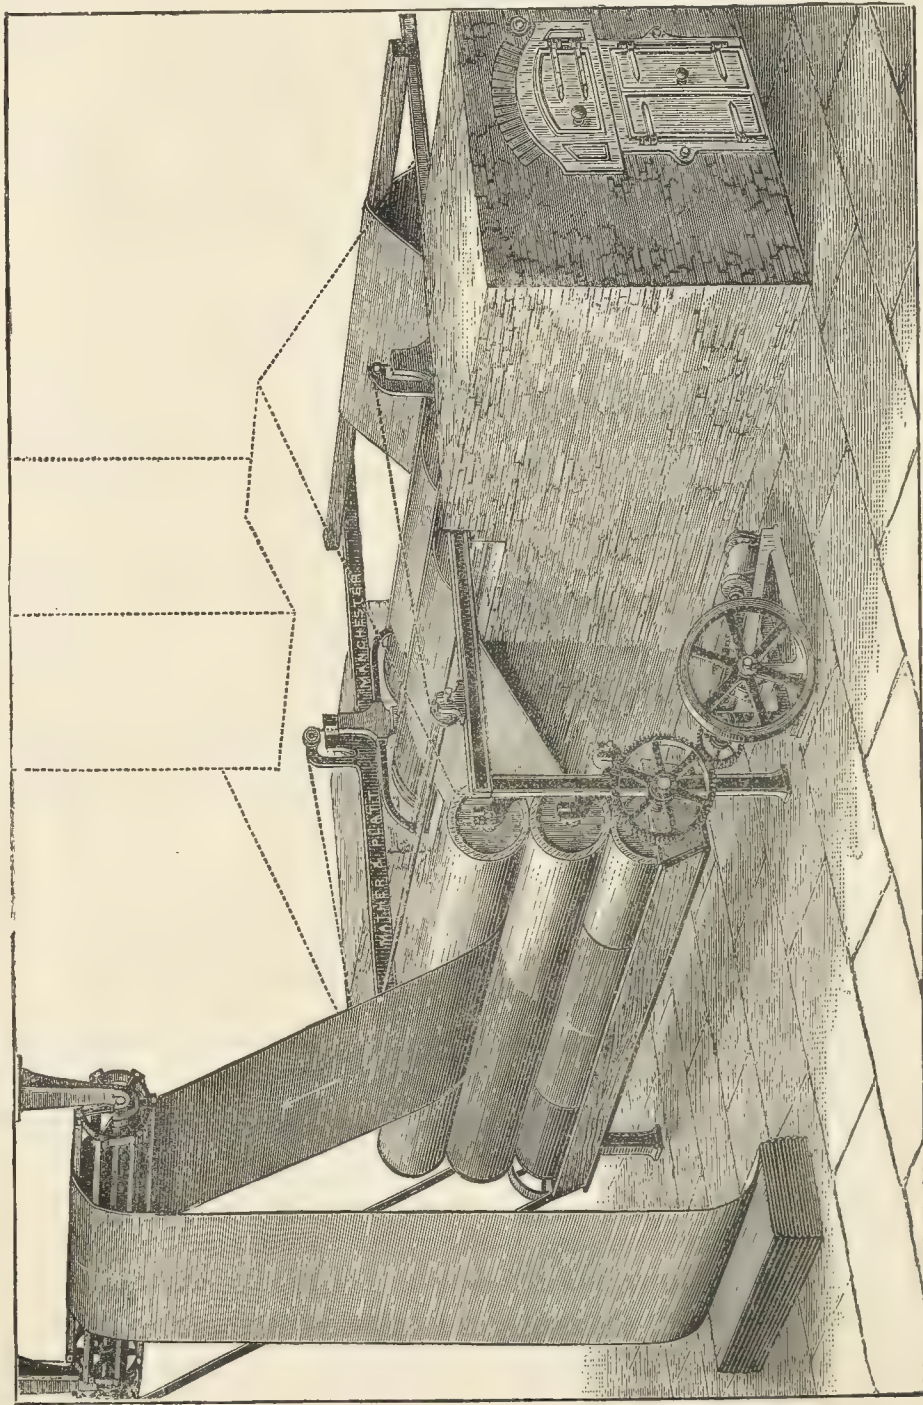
Double plate-singeing machine, showing draw bowls and damping trough.
